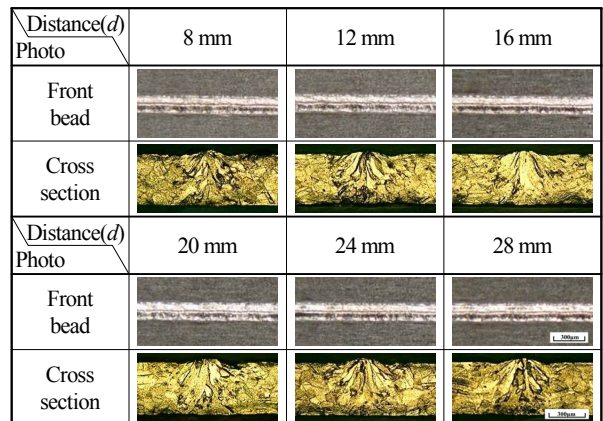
Various bead shapes with distance between shield gas nozzle-lip and laser incident point using coaxial gas nozzle in bead welding($f_d=0$ mm, $P_L=500$ W, $v=10$ m/min)
